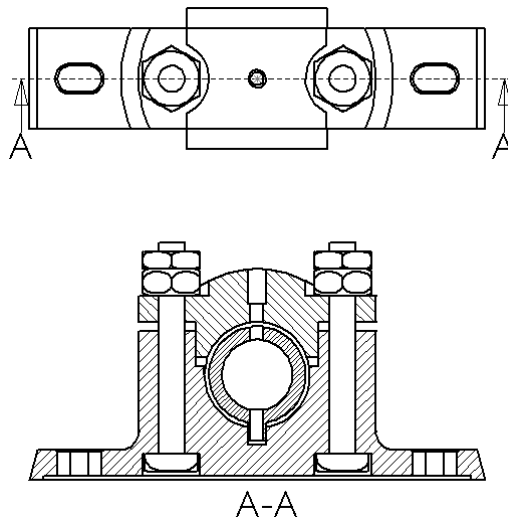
Section view of an assembly with some of the components excluded from the section scope
